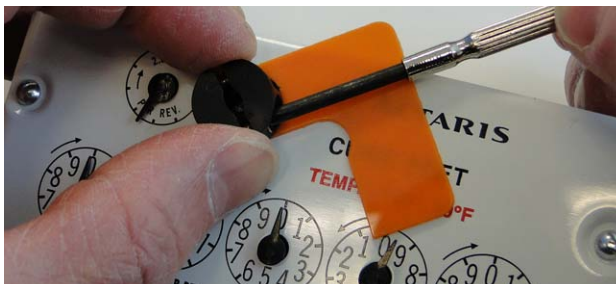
5. Insert Shim and Alternately Tighten Screws To 1.2 inch-lbs. (± 0.10 inch-lbs.)
